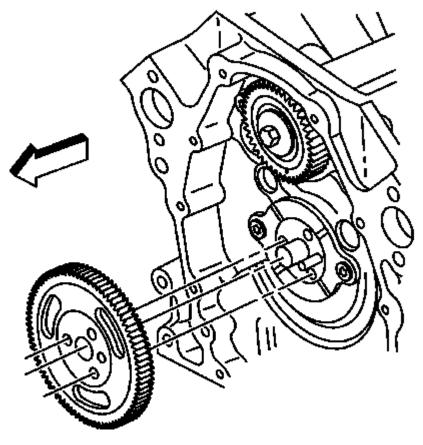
View Of Balance Shaft Drive Gear Courtesy of GENERAL MOTORS CORP.
